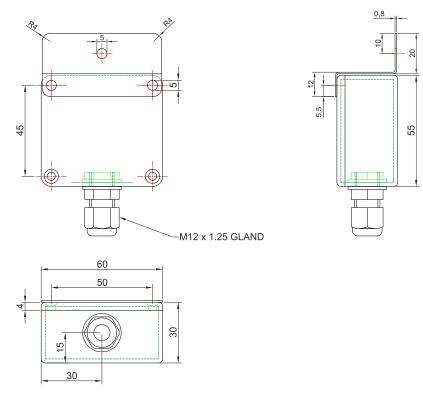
ProReact EN Analogue End-of-line Unit Dimensional Drawing
